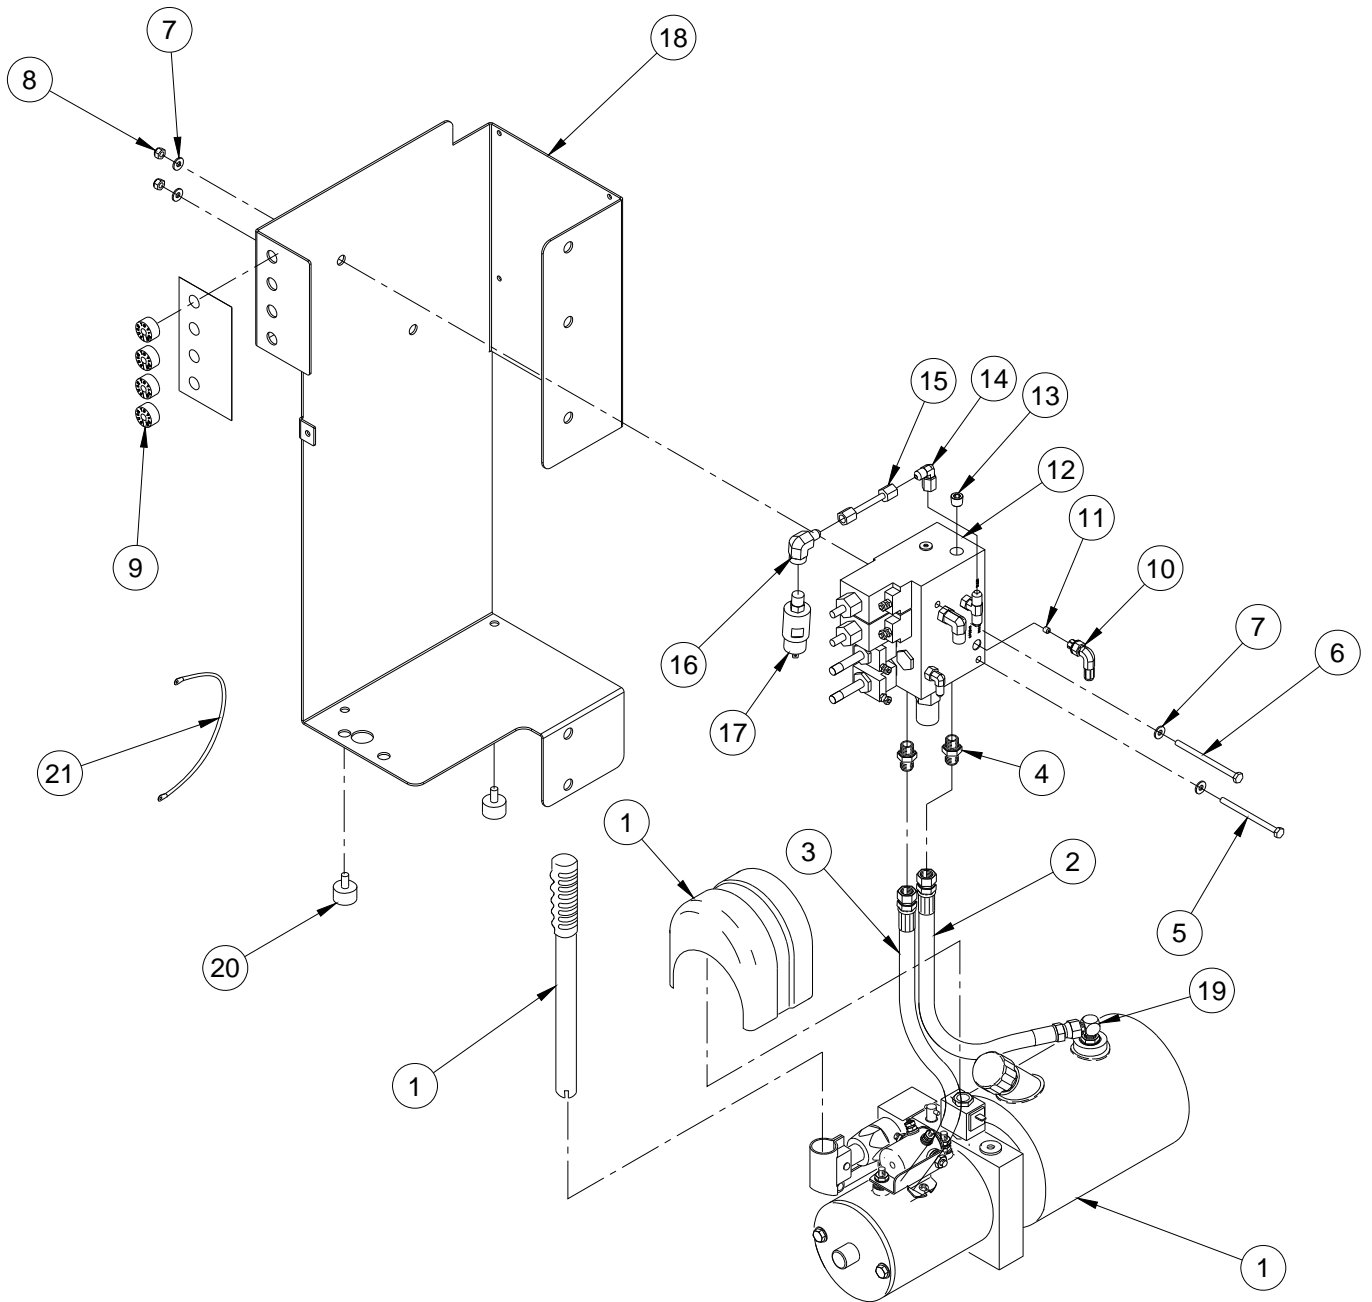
MANIFOLD & PUMP ASSEMBLY
